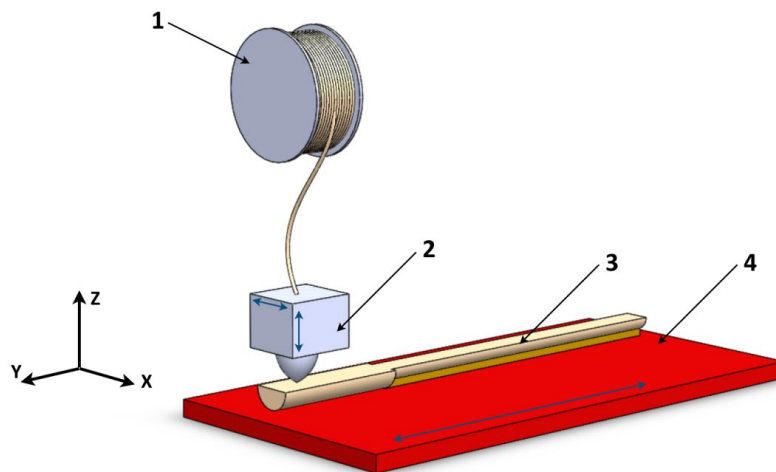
Scheme of FFF process: 1) Filament spool, 2) Extruder, 3) specimen, 4) hot bed.
